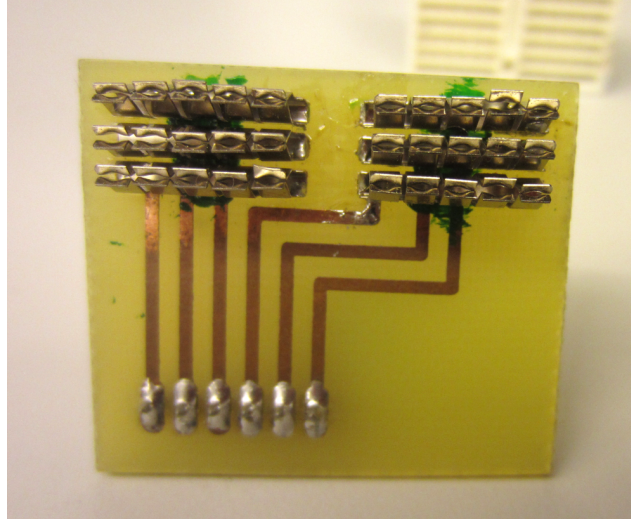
Breadboard rails hand-mounted on copper clad PCB
